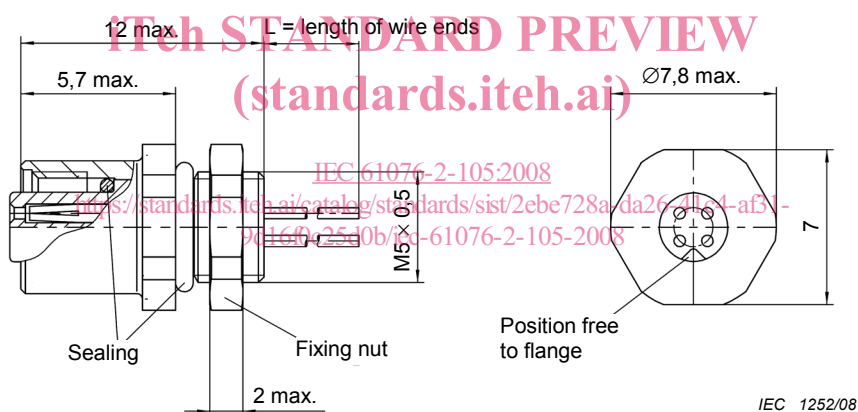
Fixed connector, female contacts, mounting with thread M5 x 0,5, with wire ends, single mounting, thread M5 x 0,5, mounting orientation
